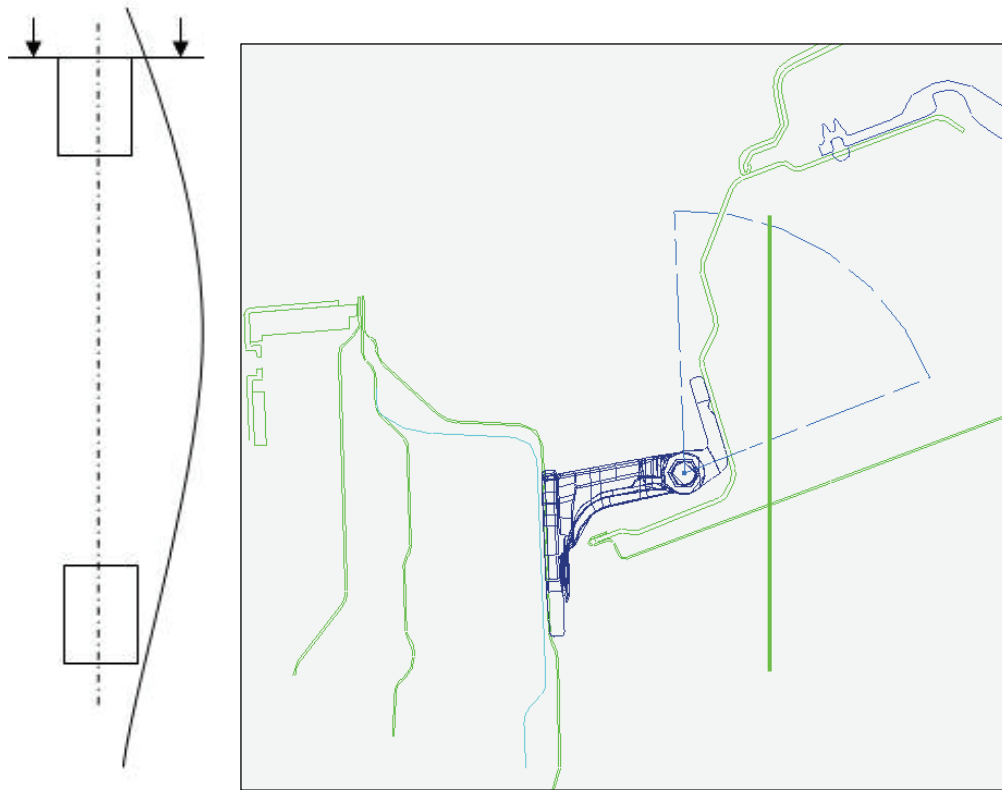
Turned in door with crash profile, hinge and pillar (Fischer, 2006)
